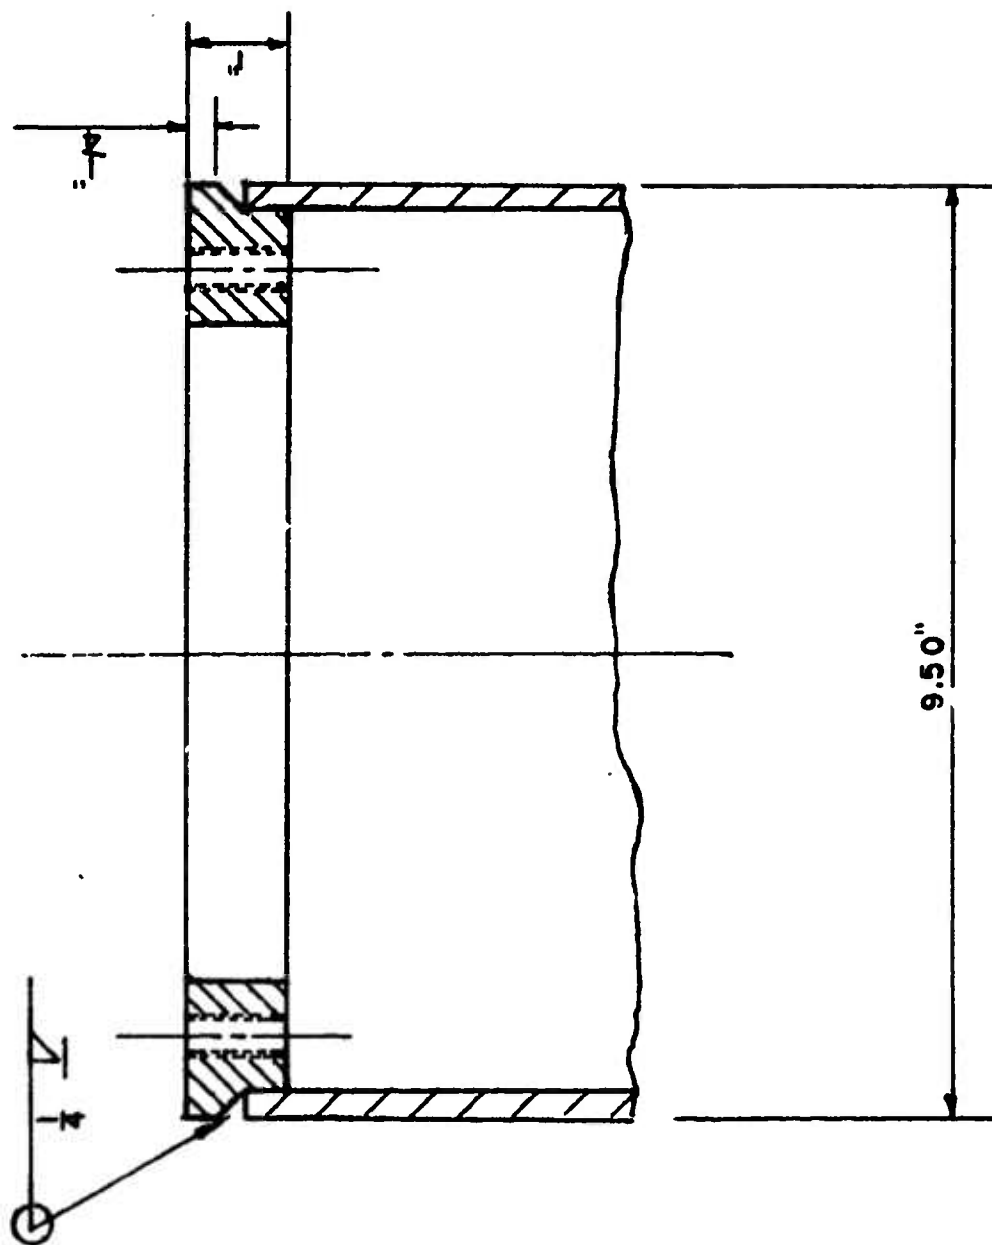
MODIFIED TOP INSIDE FLANGE RING USED ON THE PROTOTYPE UHF POLEMAST ANTENNA
